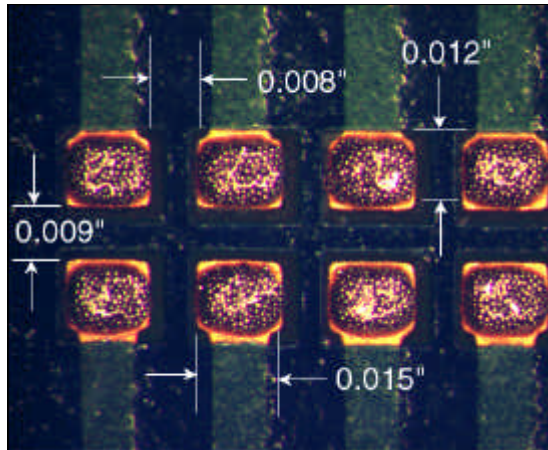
Printed Solder Paste on Attachment Pad BEG
